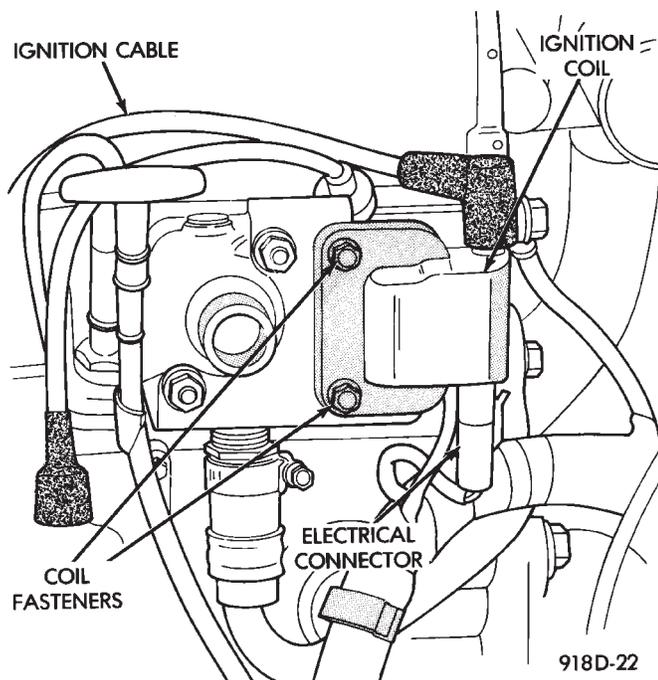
Ignition Coil—2.2L TBI, 2.5L TBI and Turbo I Engines
